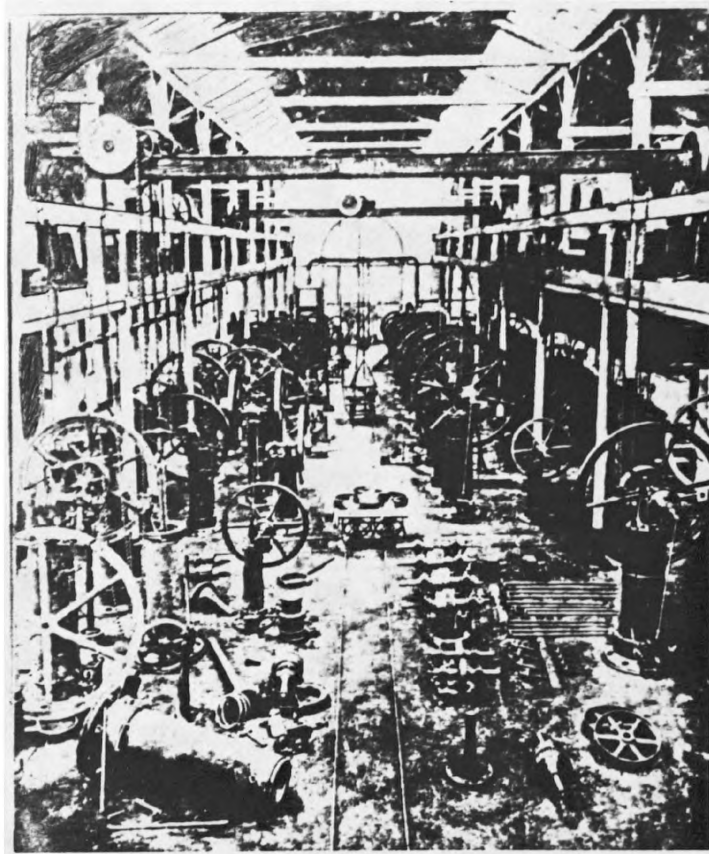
Assembly shop, Gasmotoren Fabrik, Deutz
